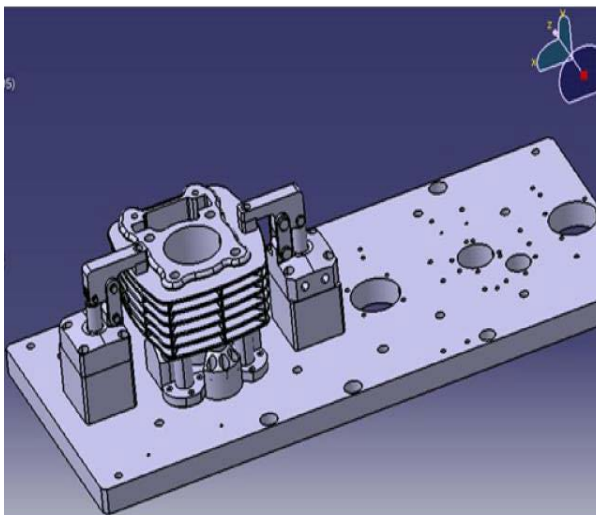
1st type Fixture assembly with and Cylinder block
